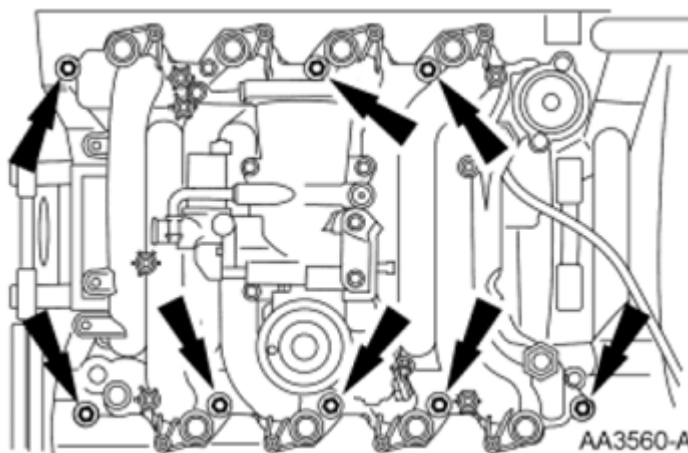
Locating Bolts And Coolant Outlet Adapter
